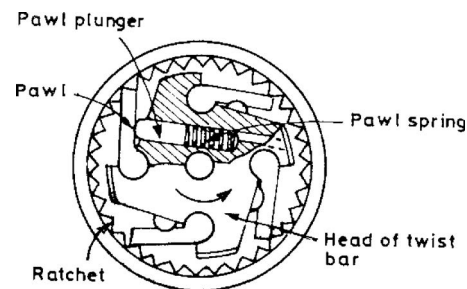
Sketch showing the ratchet and pawl arrangement of jackhammer drill machine.
